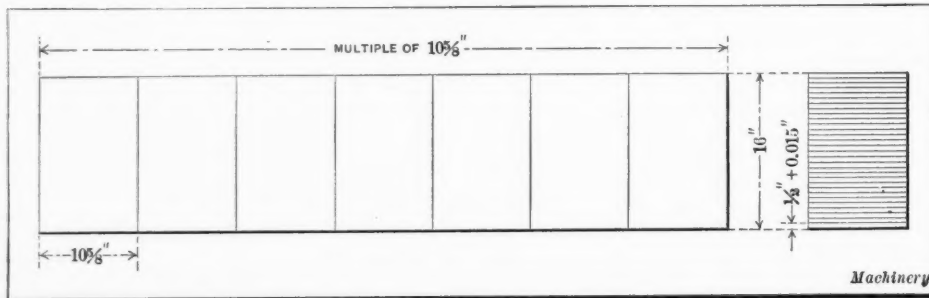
Diagram showing how Sheet Steel is cut up into Saw Blade Blanks
